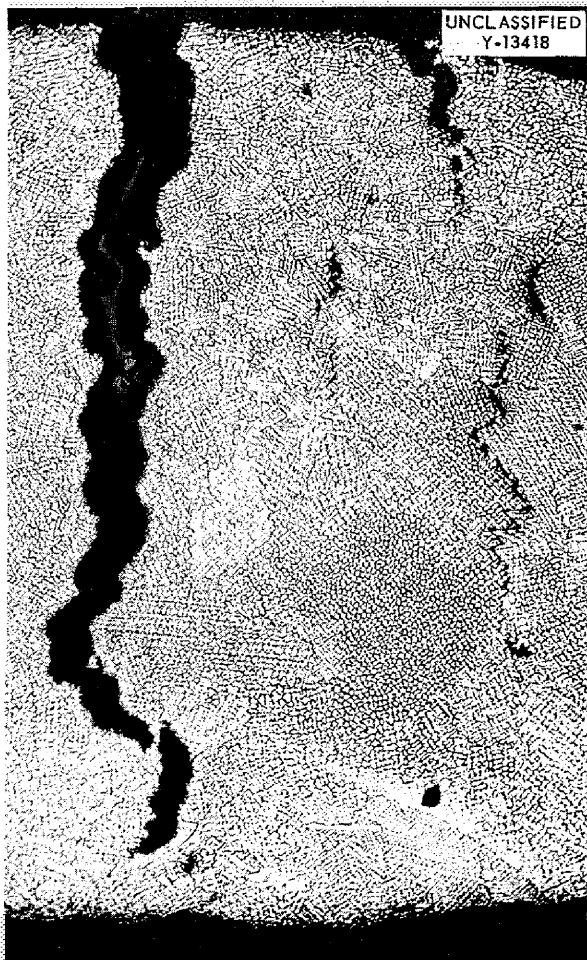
Cross Section Through Thermocouple Weld Crack.
